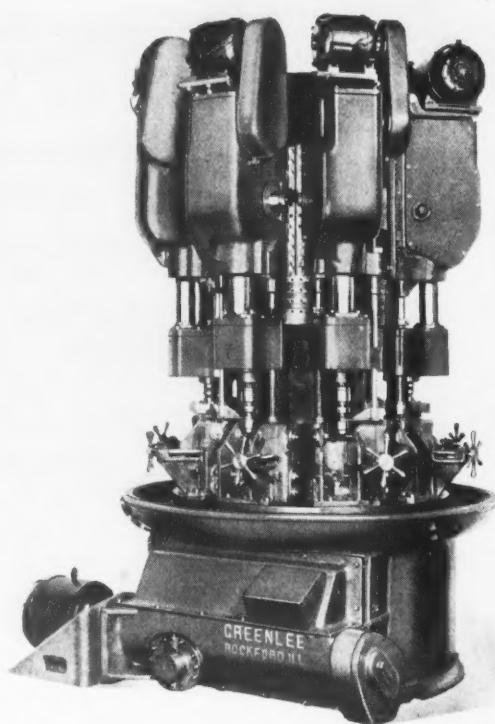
Greenlee Vertical Indexing Machine with Tool-heads Fed by Cams on an Oscillating Drum
